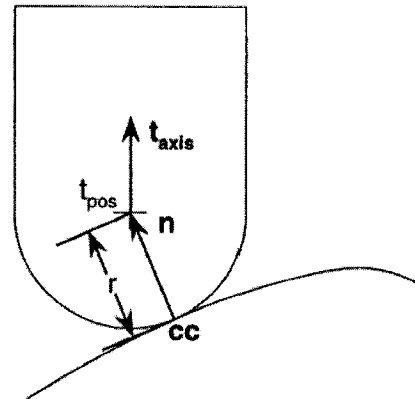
Positioning a ball nosed tool for machining a sculptured surface
